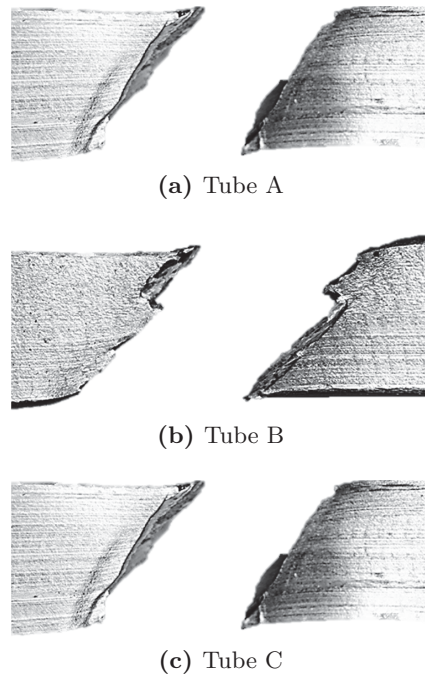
Fracture surfaces of the samples A (a) , B (b) and C (c) after tensile experiments. The in-plane width of the samples is equal to tube wall thickness whereby the upper part represents the tube outer surface.
